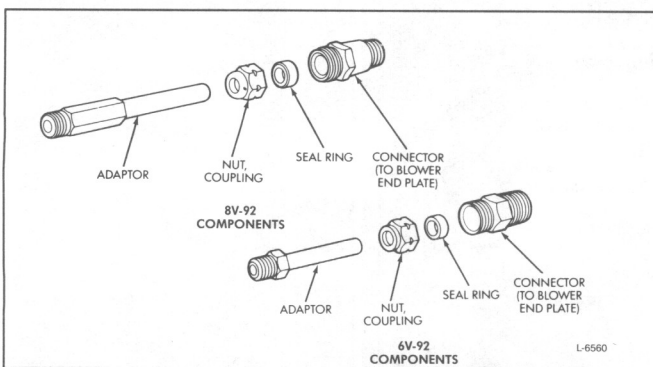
Mini-Bypass Oil Transfer Tube Assembly Components
